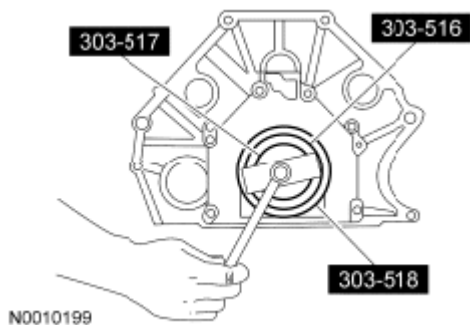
Identifying Crankshaft Rear Seal Installers And Crankshaft Rear Oil Slinger Installer
